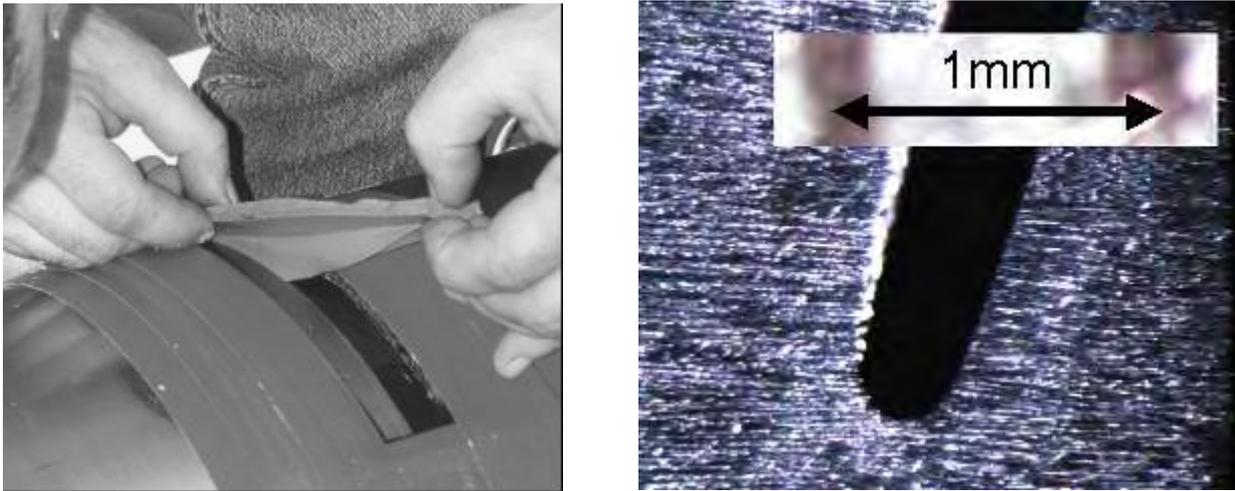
Insertion of a precision simulated crack in the Adimew dissimilar weld component.
